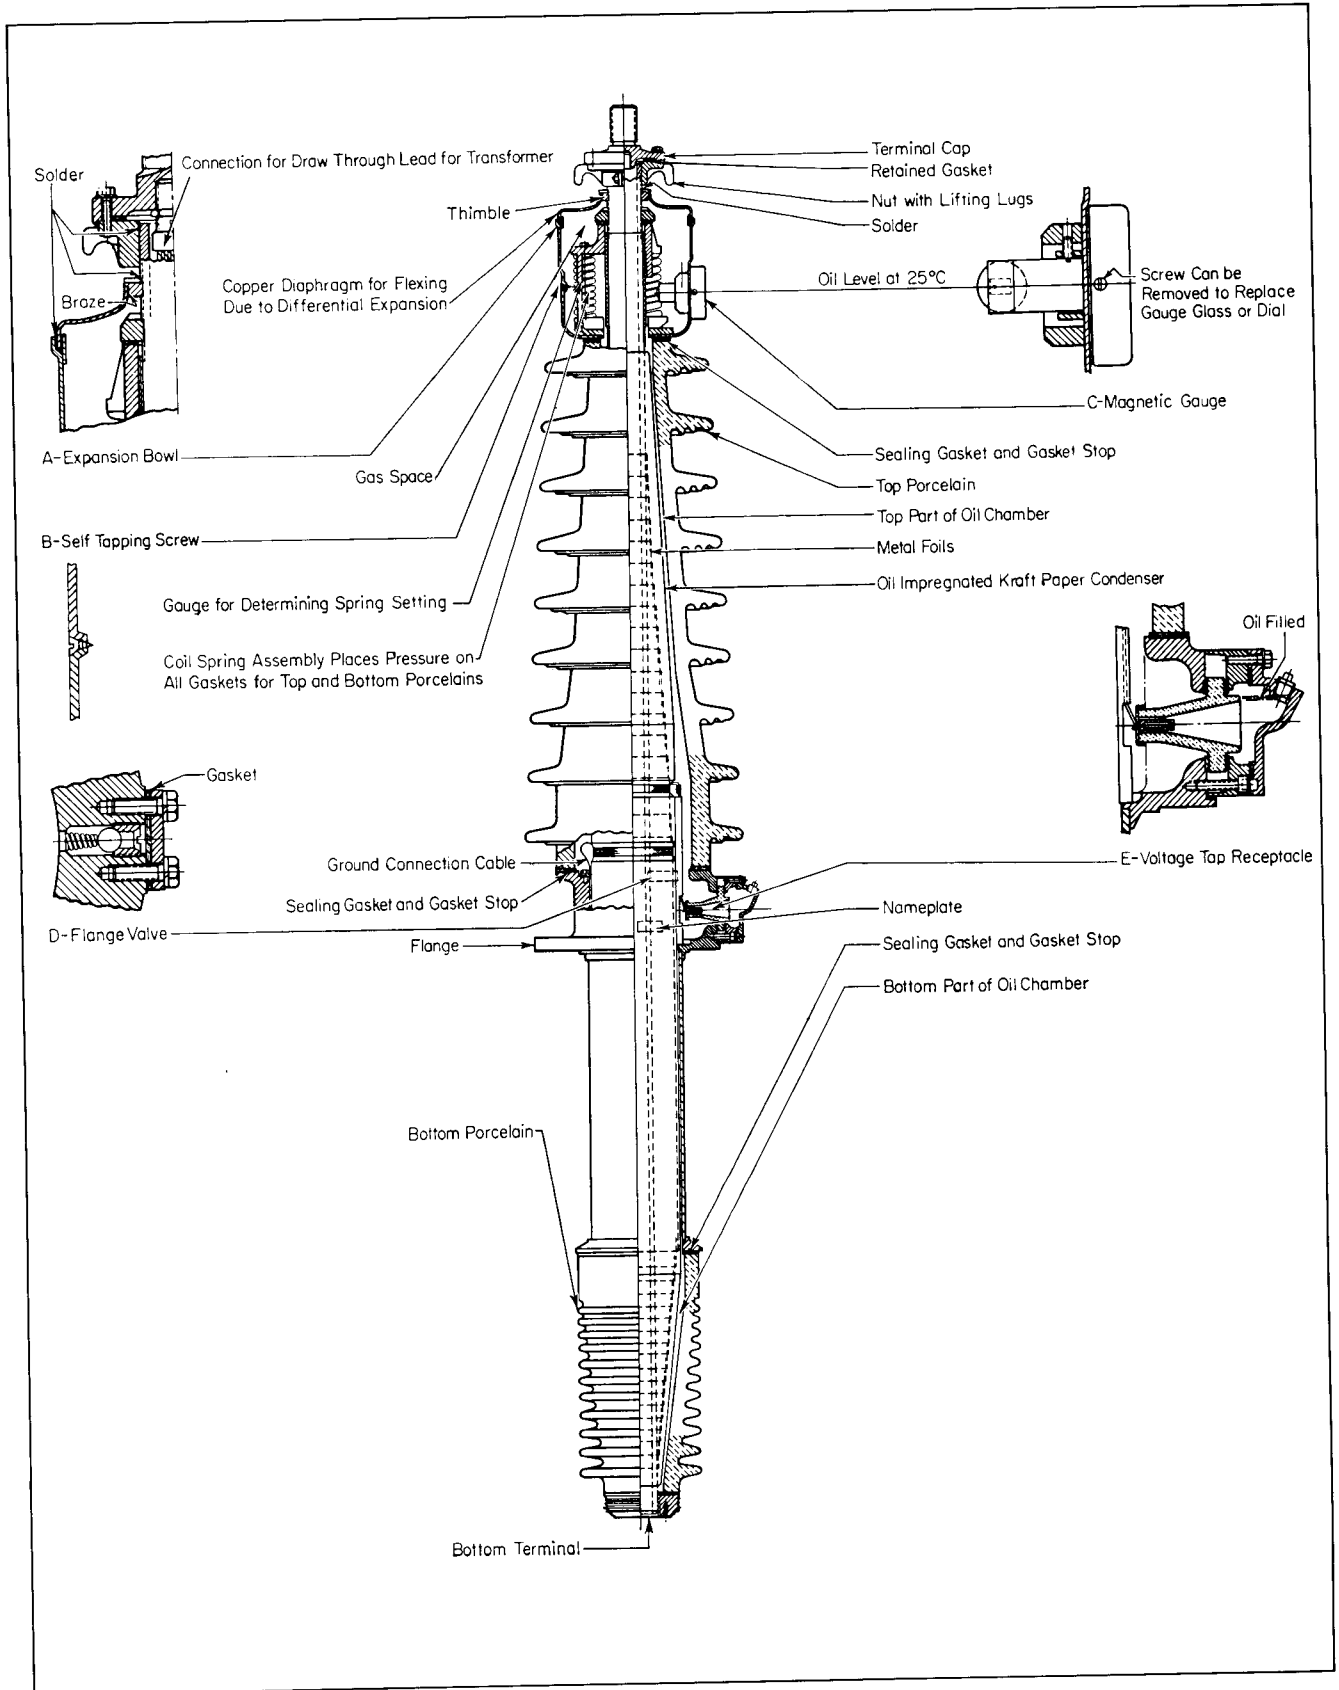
Sectional View—Condenser Bushing, Type "O"
